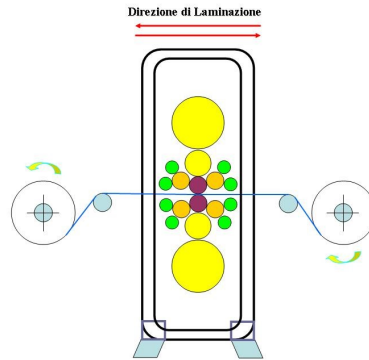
"ZHi" Sendzimir rolling mill scheme
